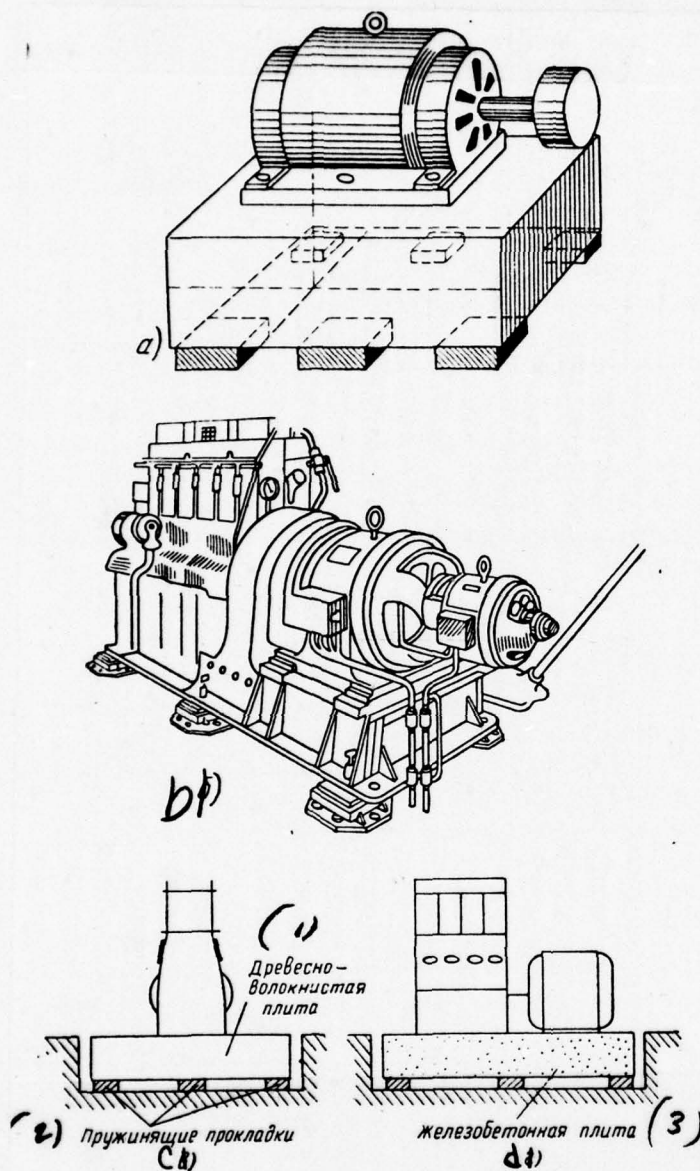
Vibration damping elastic and spring cushions. a—the mounting method of machines on cushions, b—an example of the setting up of generator on spring shock absorbers, c and d - combination of
